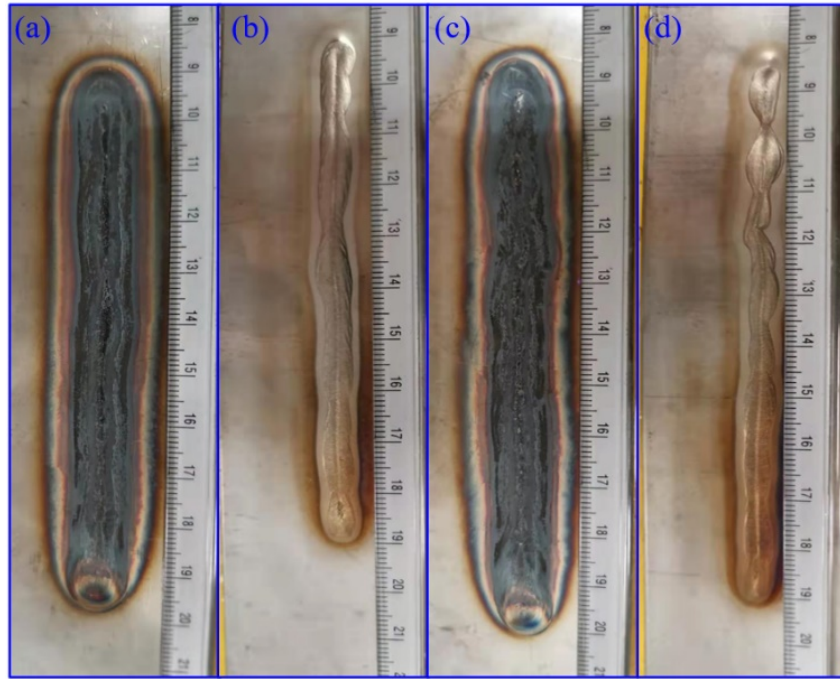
The Welded Workpieces from the Welders with Different Professional Levels. (a) and (b) Are the Front and Back Side from Skilled Welders and the Quality Is Satisfied; (c) and (d) Are the Front and Back Side from Unskilled Ones and the Quality is Unsatisfied.
